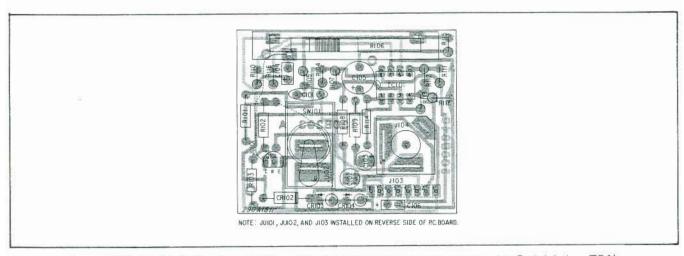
B. PA/Radio Pre-Amp. PC Board Parts Location Diagram (for units with FLA label on TB1).
